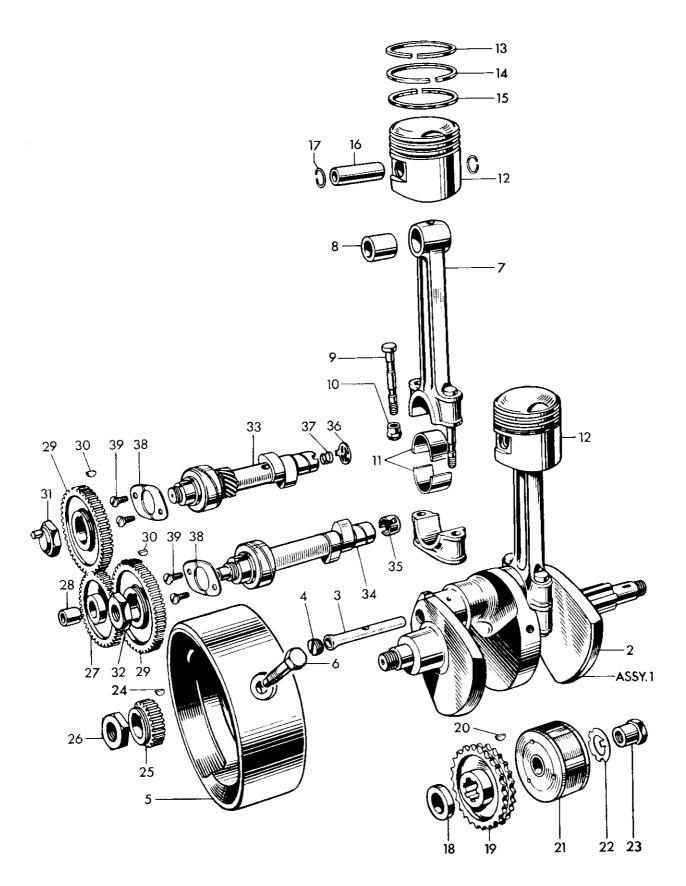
CRANKSHAFT AND CONNECTING RODS
